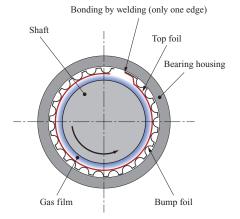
Schematic cross sectional view of foil-type dynamic radial gas bearing
